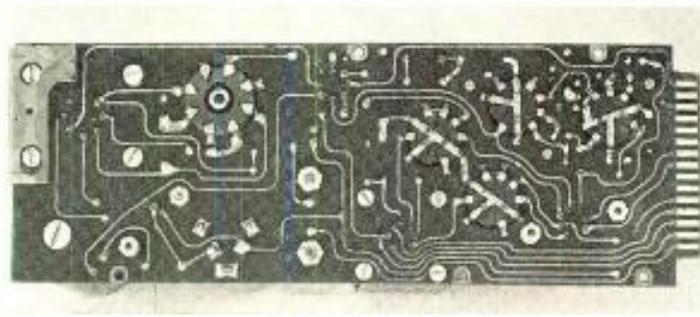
Printed circuit boards have rhodium-plated contact tips
